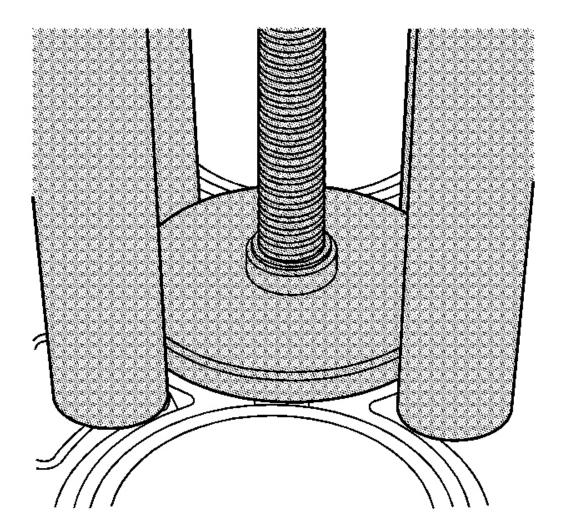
Seating Cylinder Bore Sleeve Completely Using Tool Courtesy of GENERAL MOTORS CORP.
